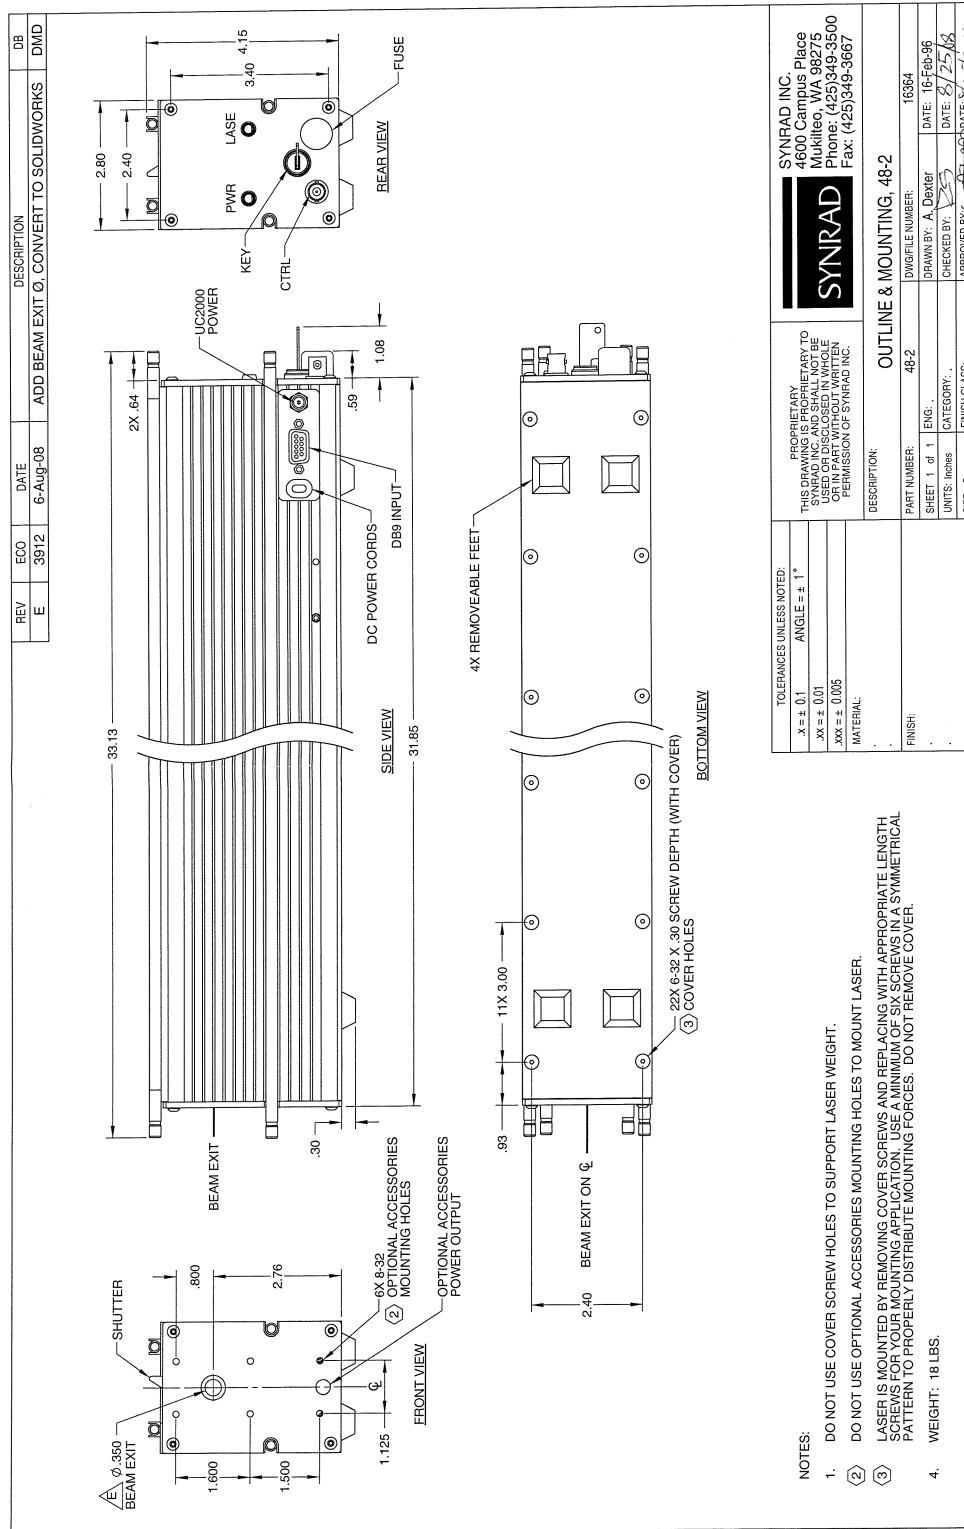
Model 48-2 package outline and mounting dimensions, 2 of 2.
